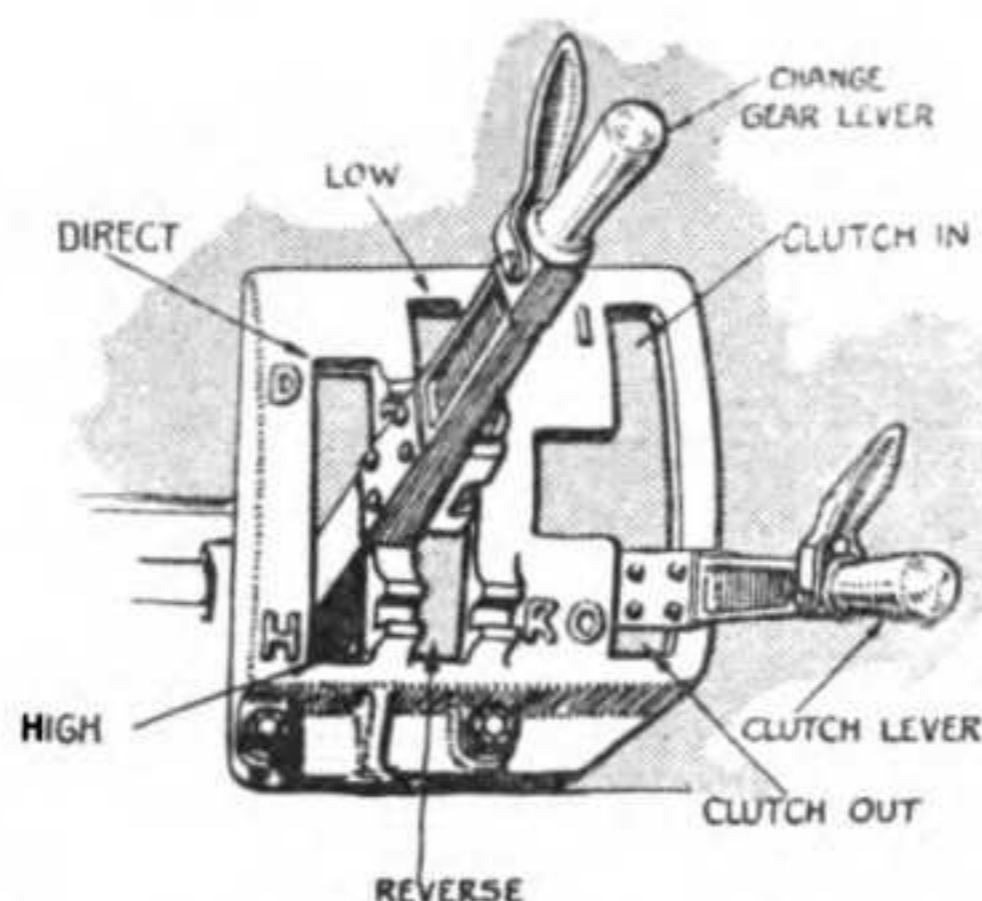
POSITIONS OF GEAR SHIFT LEVER
